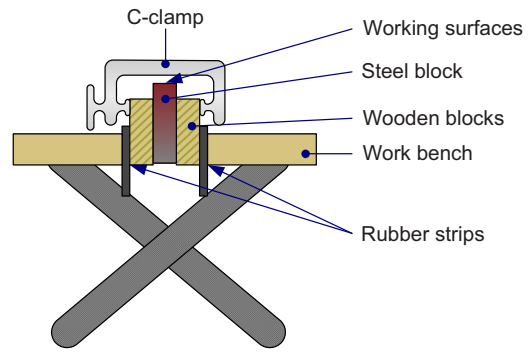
Test jig for supporting a steel block to steel structure to constrain motion.
